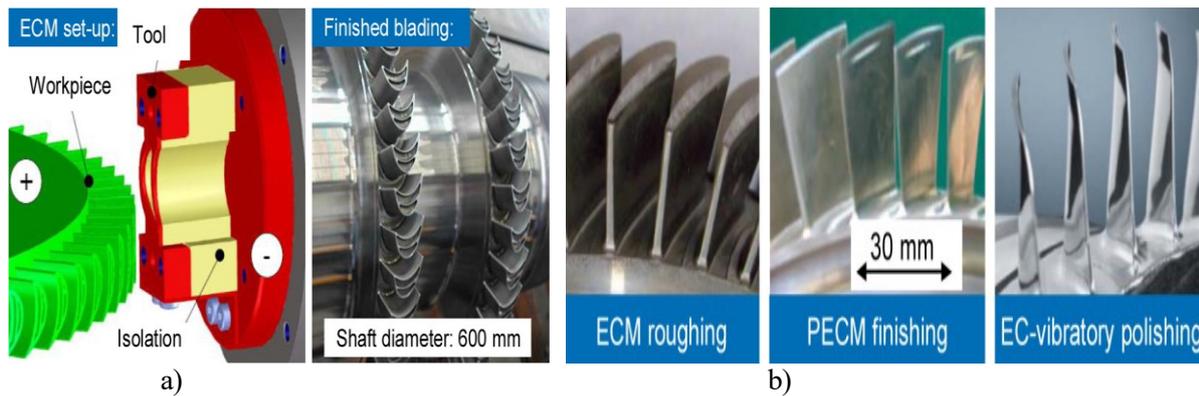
A diagram of machining of blades in a monolithic "blisk" turbines constructed from ((X22CrMoV2111) material; (Figure 5a); manufacturing of blades takes place over three stages (Figure 5b) – classic rough machining, finishing pulse electrochemical machining and electrochemical vibratory polishing
